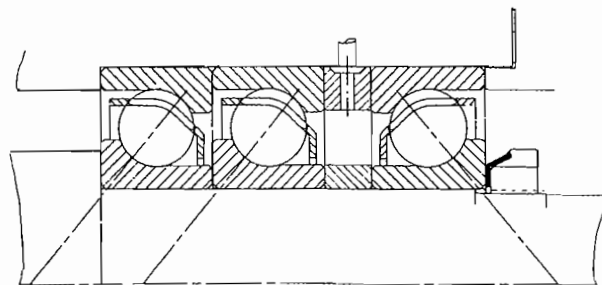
Triplex Mounted Angular Contact Ball Bearings.
